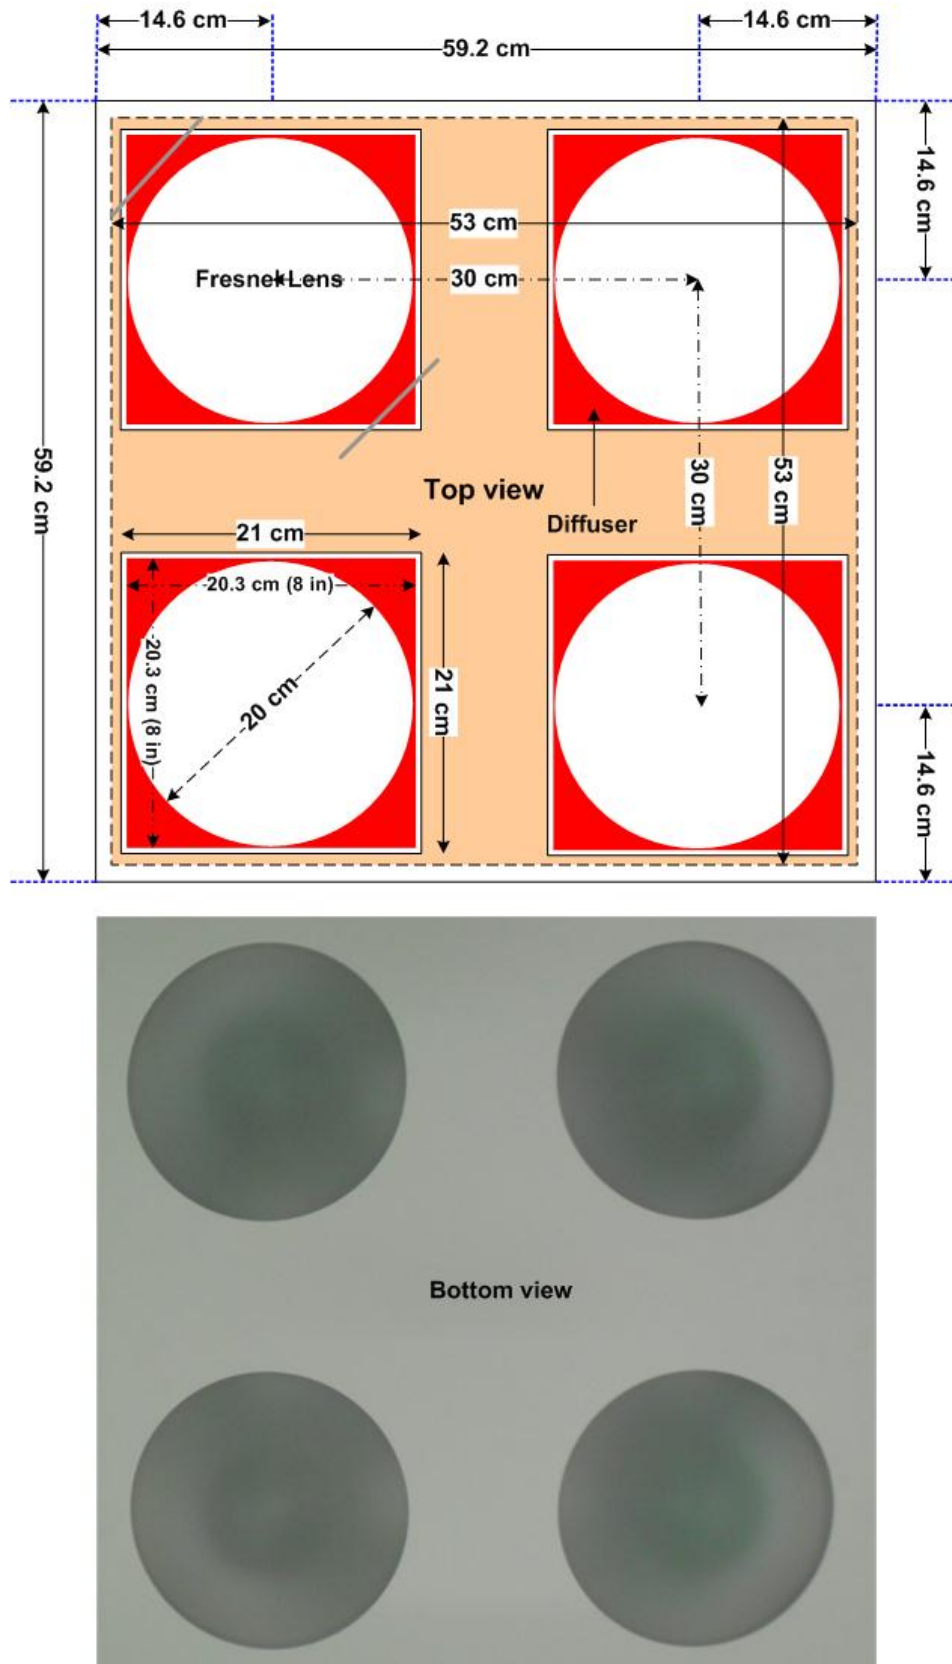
Dimensions for the Fresnel lens and diffuser.
